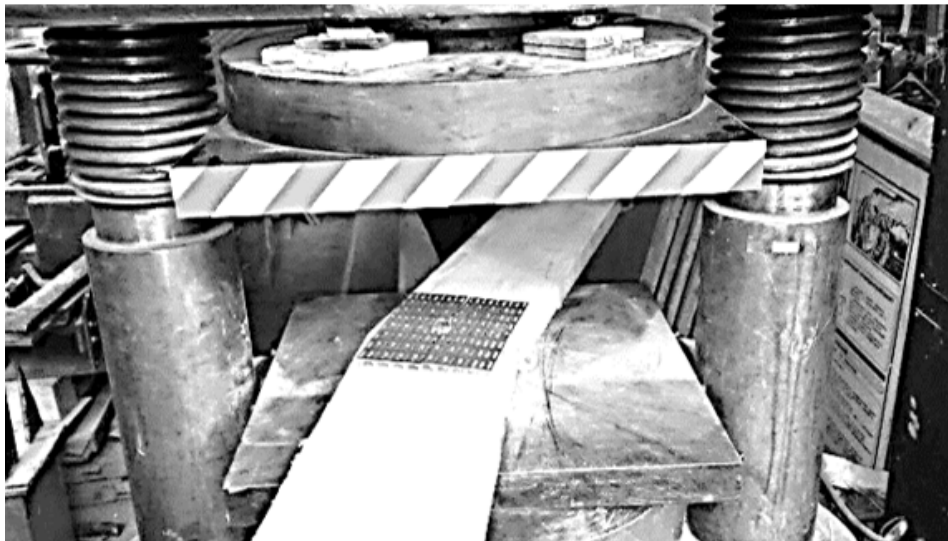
The process of pressing of clamping plates using press 2ПГ-100
